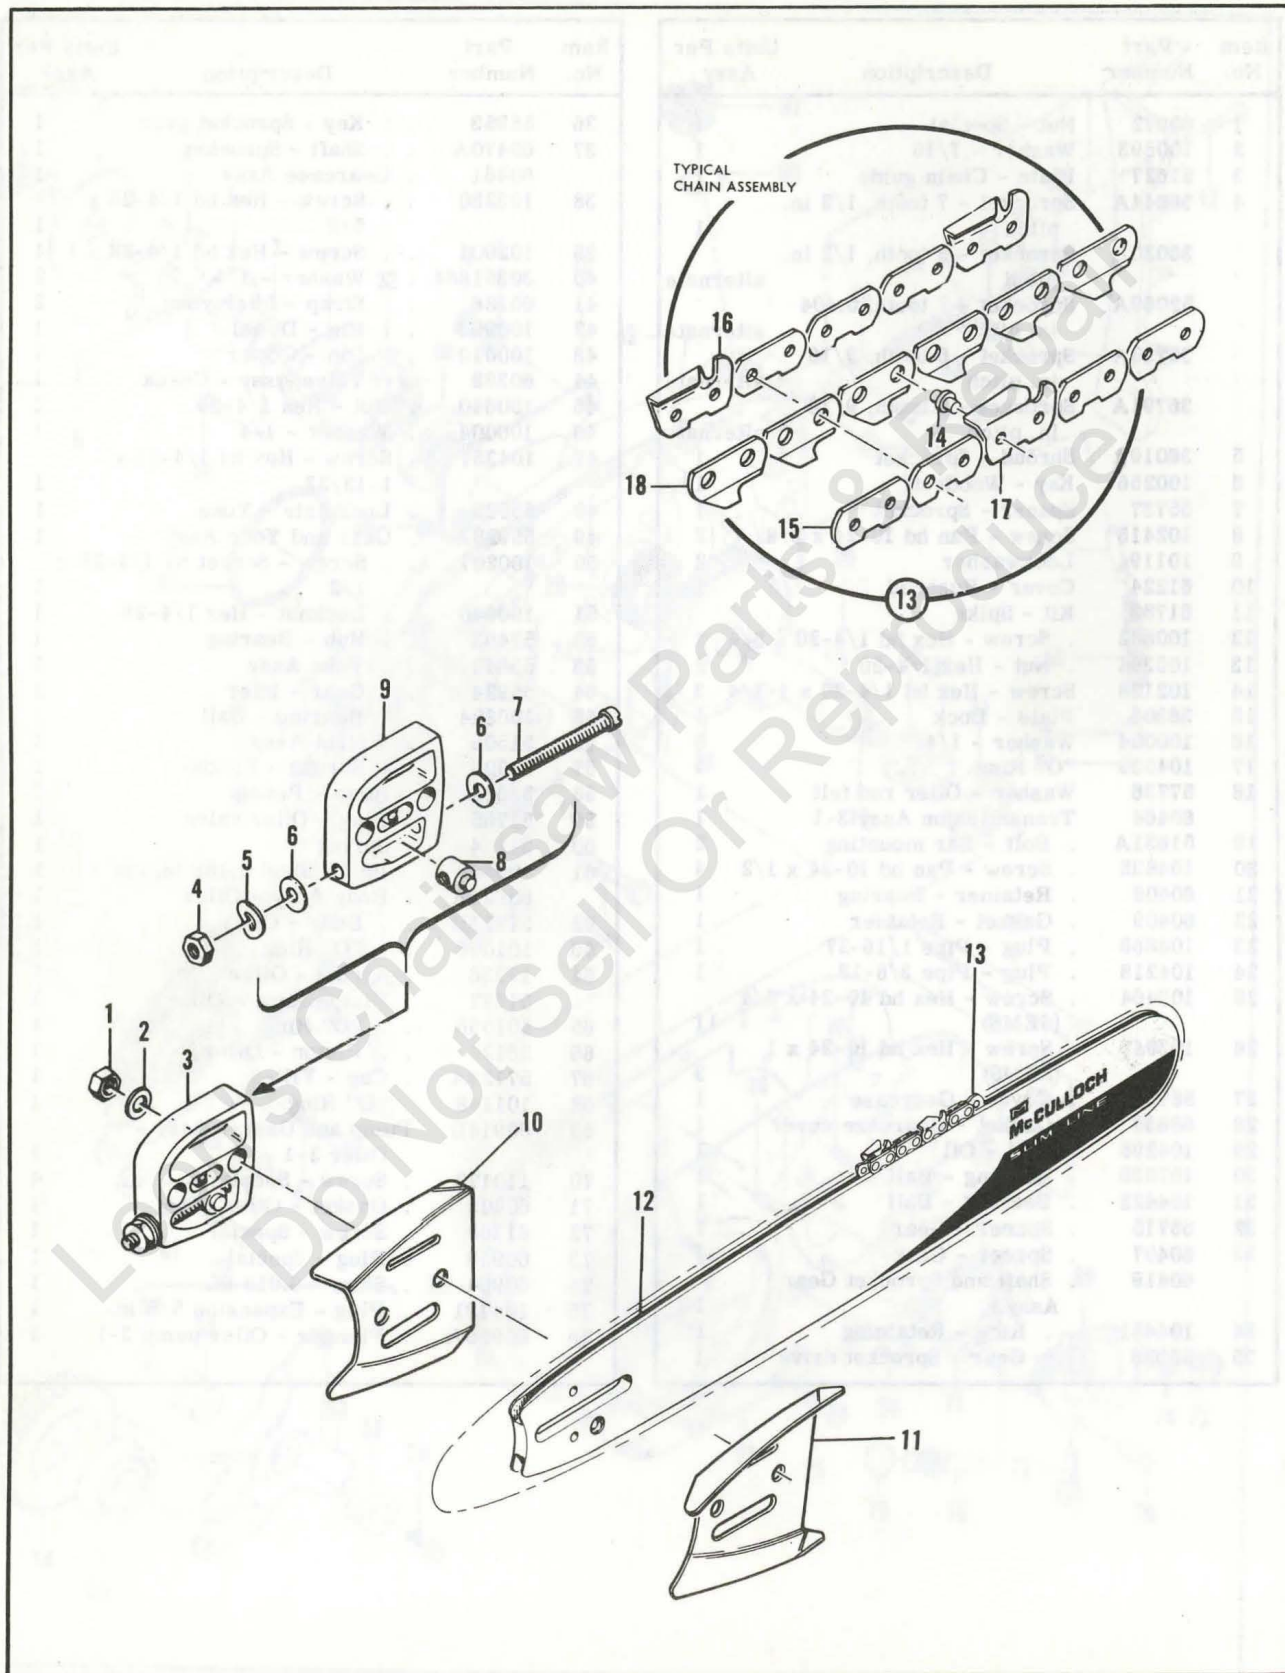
Lockplate Adjusting Assembly, Bar and Chain
